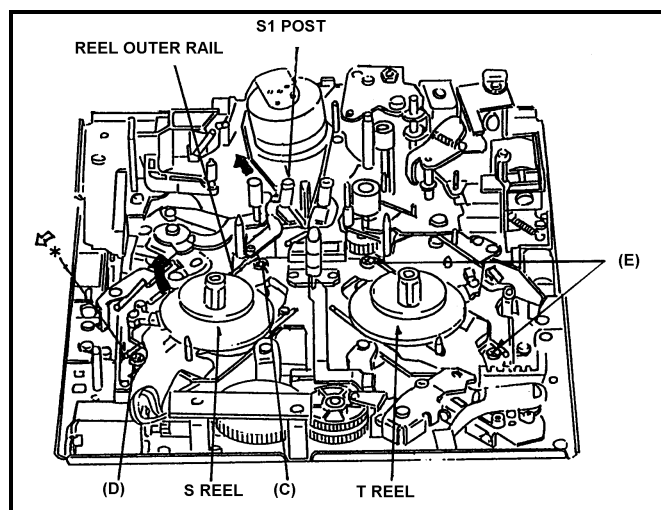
Removal of S & T Reel Rotor Unit
